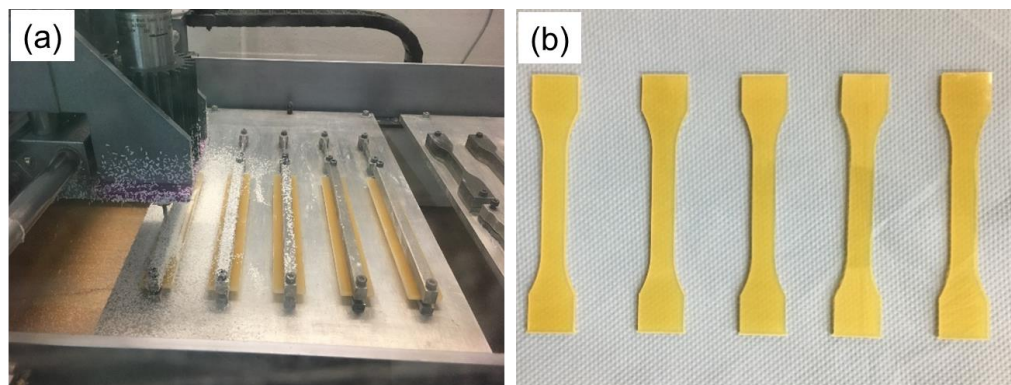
(a) Milling machine cutting the rectangular samples into dog-bone samples. (b) obtained dog-bone samples obtained after cutting.
